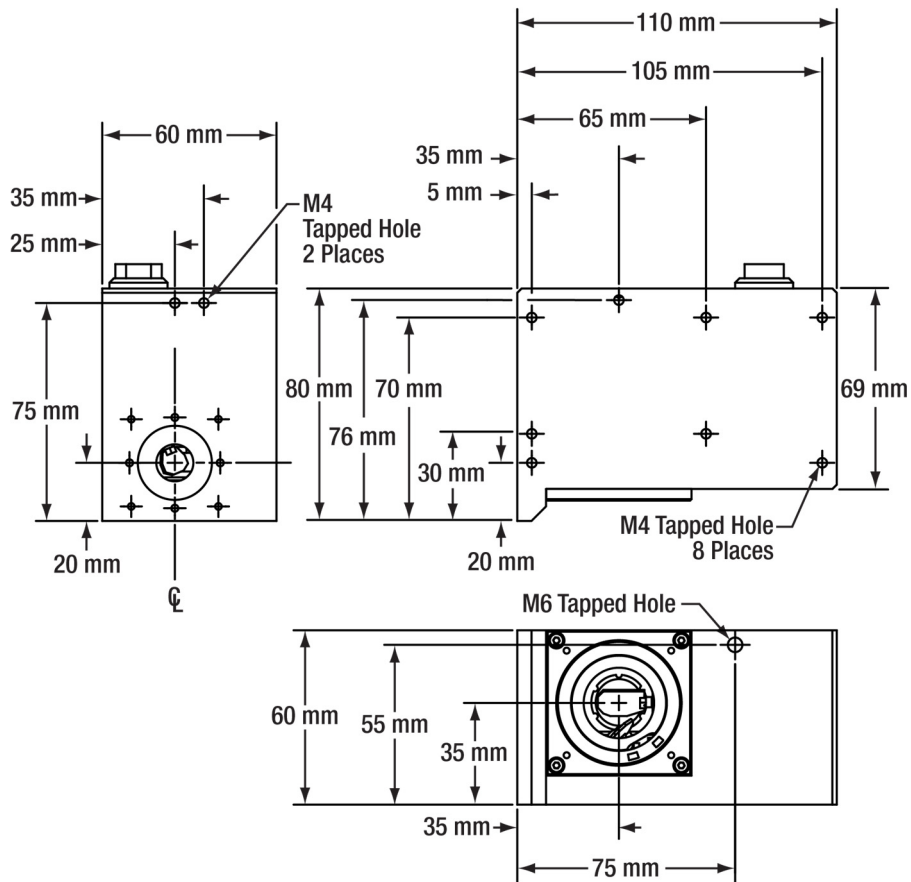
Drawing of Threaded Holes in a Metric OCTP Scan Cube Module
